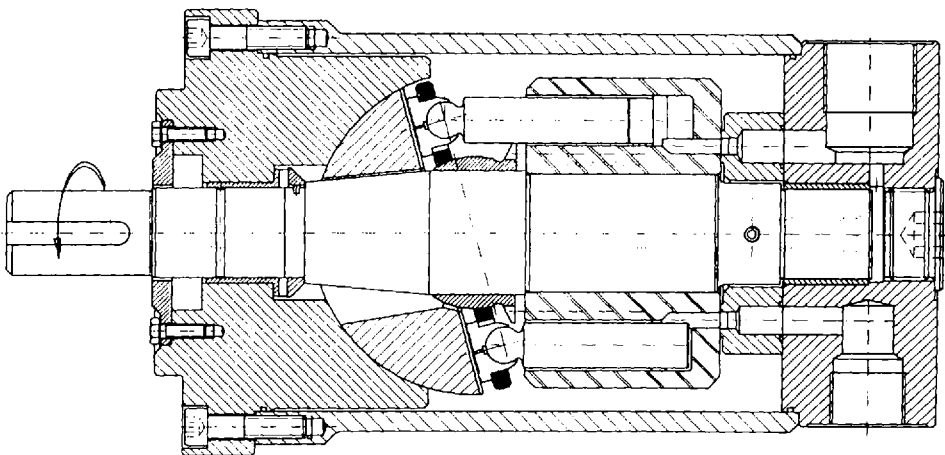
Water hydraulic axial-piston motor (Hytar).
